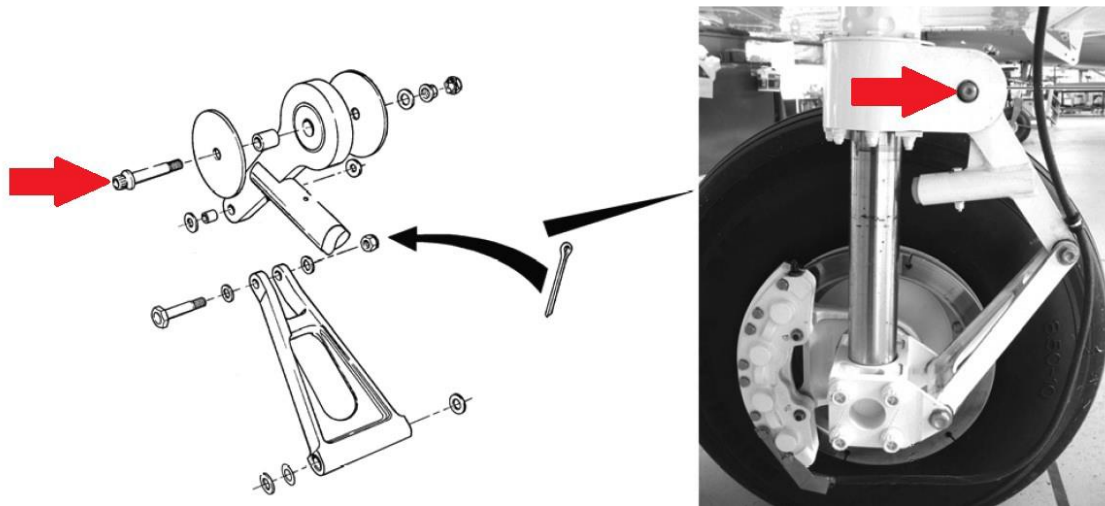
Right main landing gear leg with an exploded drawing of the torque link, whose above-right fastening bolt (red arrows) was lost (figure from the maintenance manual of the aircraft manufacturer).
